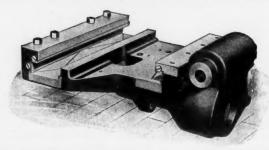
Cutter Slide Reversed, to show Gibs and Bearing Surfaces
